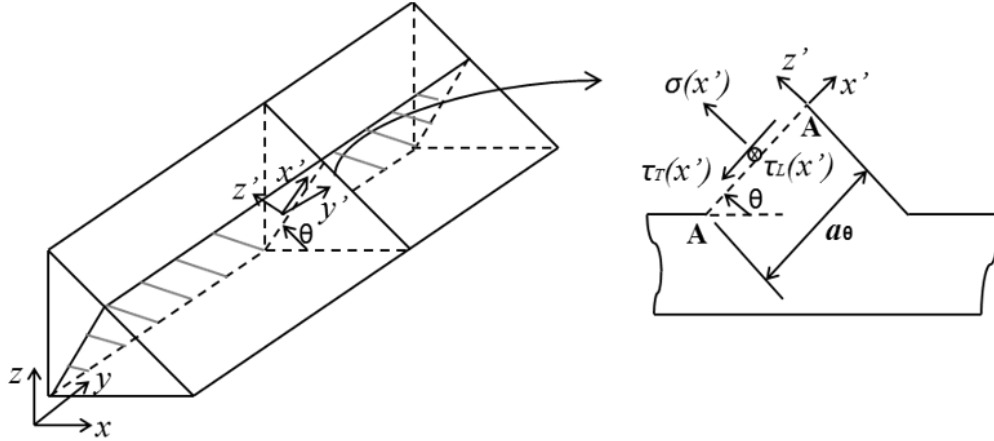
Traction stress components acting on a weld throat plane at an angle of  $\theta$ : (a) Fillet weld between base and attachment plate; (b) Traction stress definition on weld throat plane at angle  $\theta$
